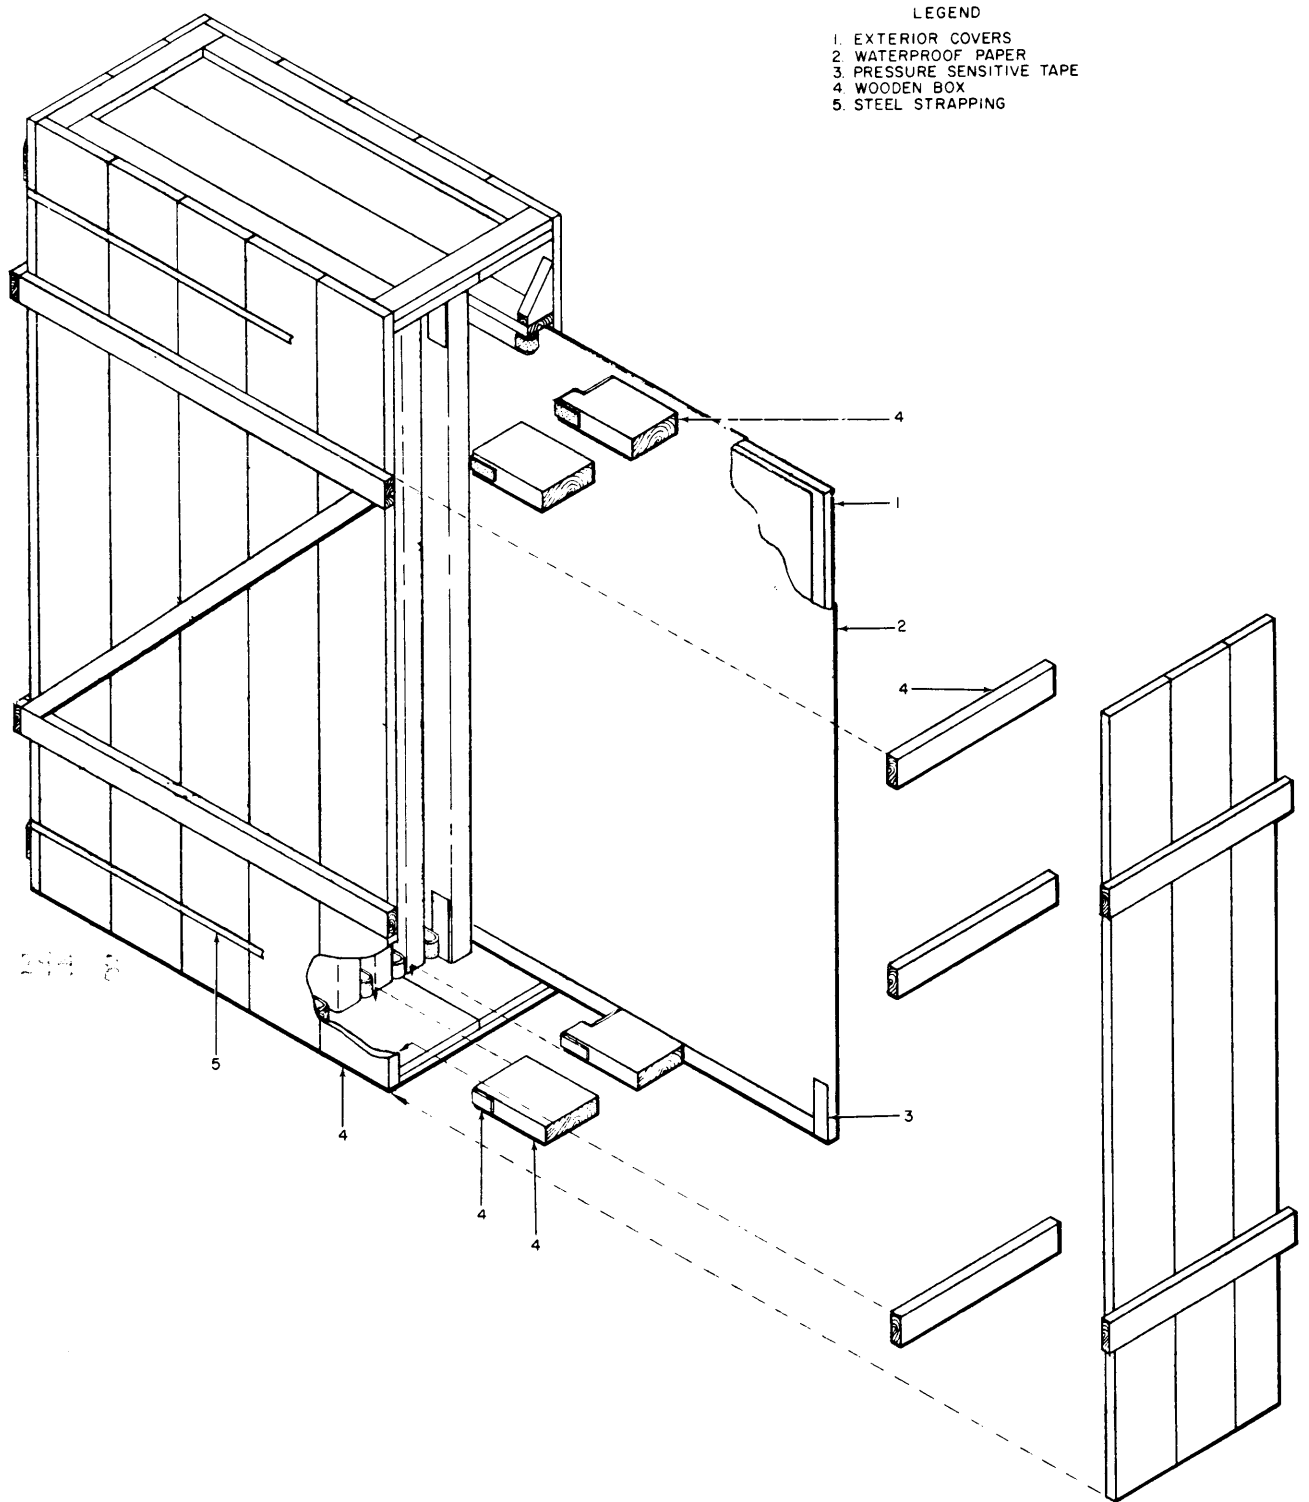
Typical Equipment Packaging (sheet 4 of 5)
